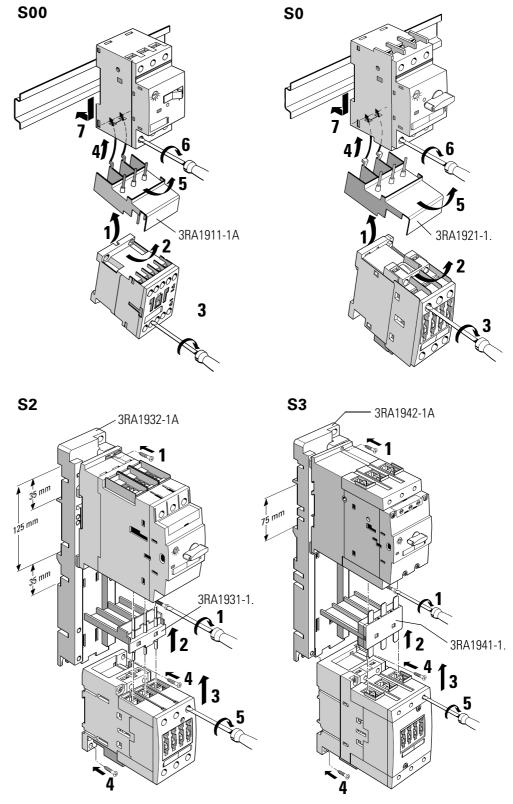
Self-assembly, rail, direct starter (frame sizes S00 to S3)
